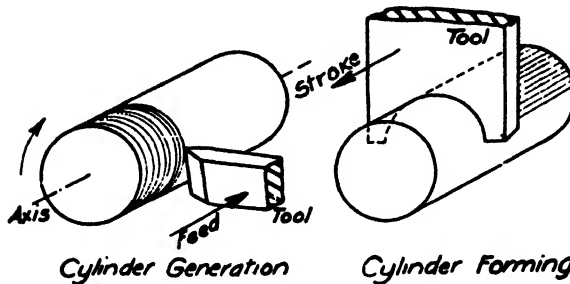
Generating and Forming a Cylindrical Surface.
